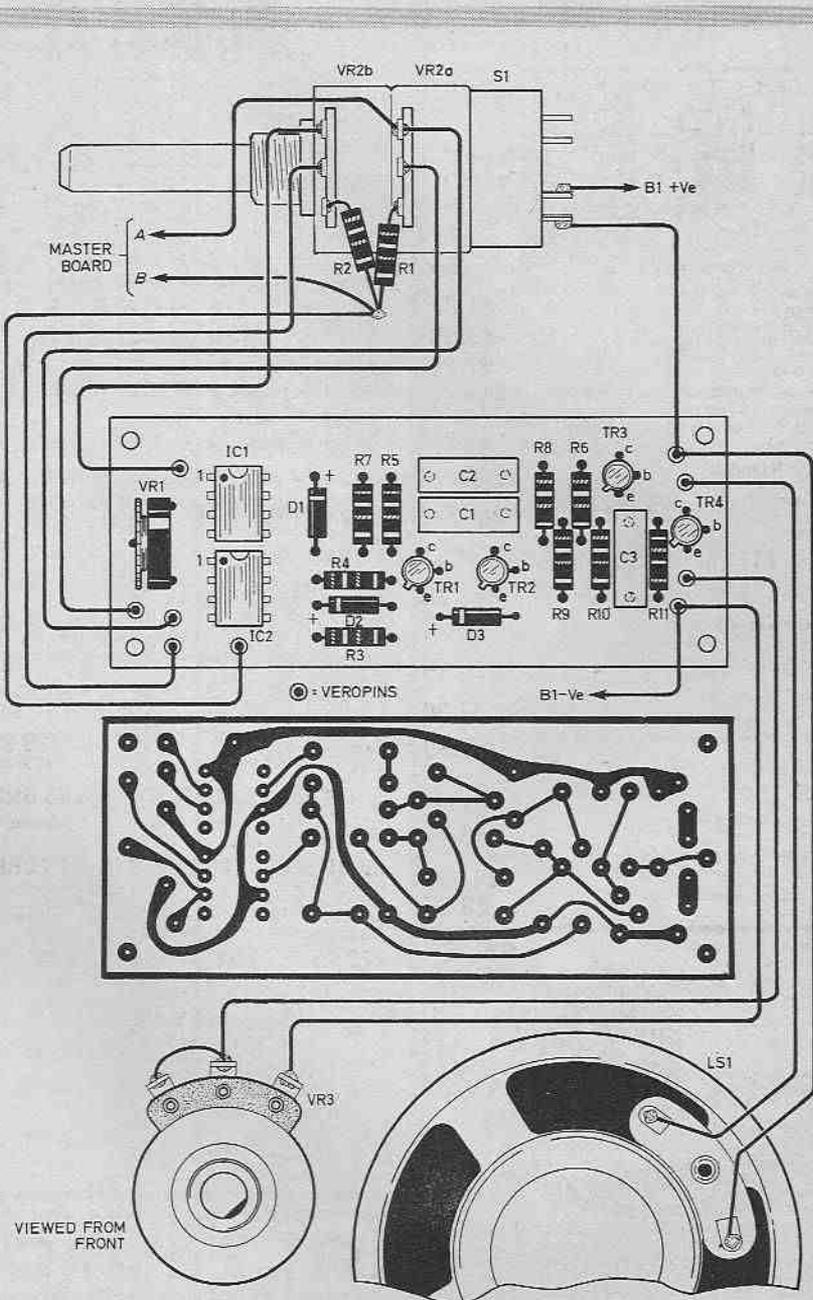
Shows the p.c.b. master full size, component layout on the topside of the board and interwiring details.
